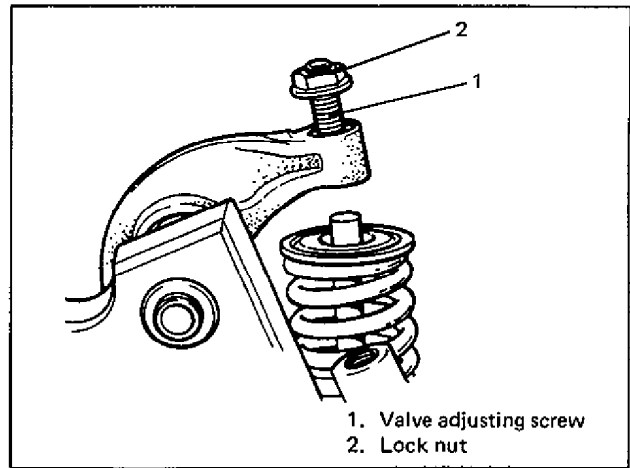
A-35 Valve Adjusting Screw and Lock Nut
